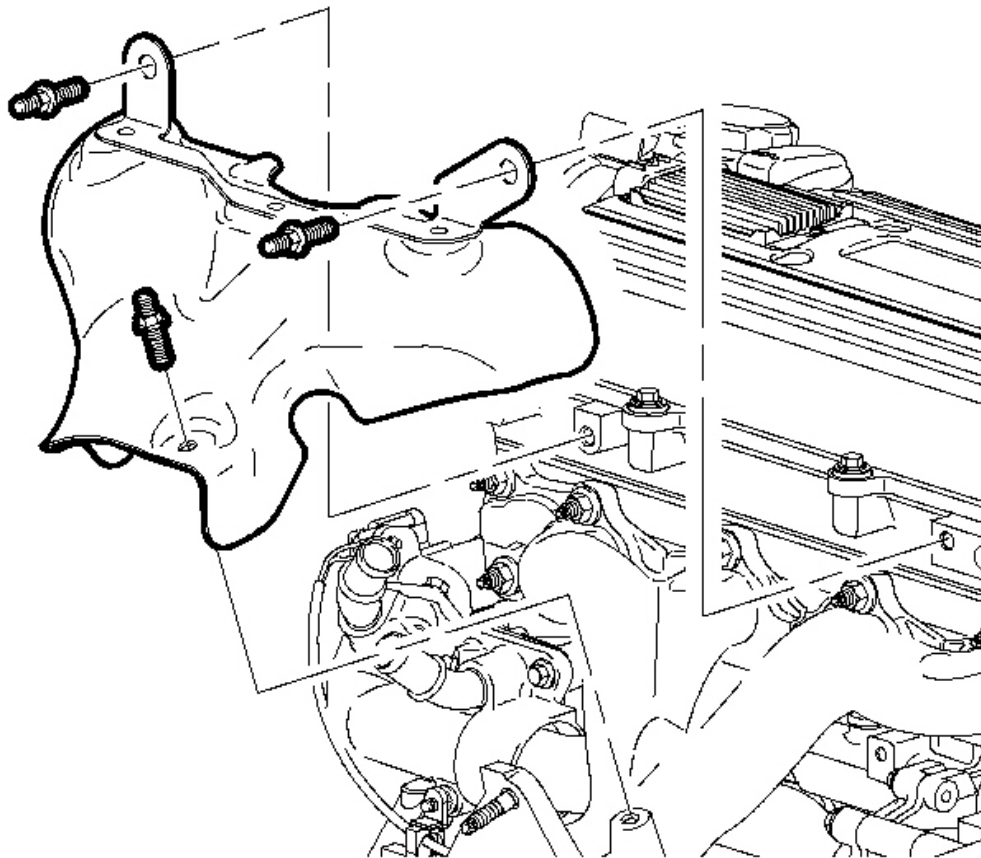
View Of Exhaust Manifold Heat Shield (L61)
